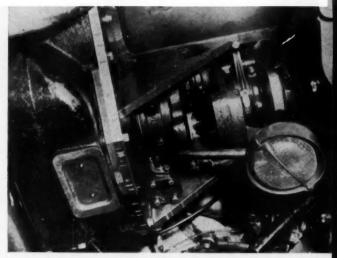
Experimental gusset to stiffen joint between clutch housing and engine block.
